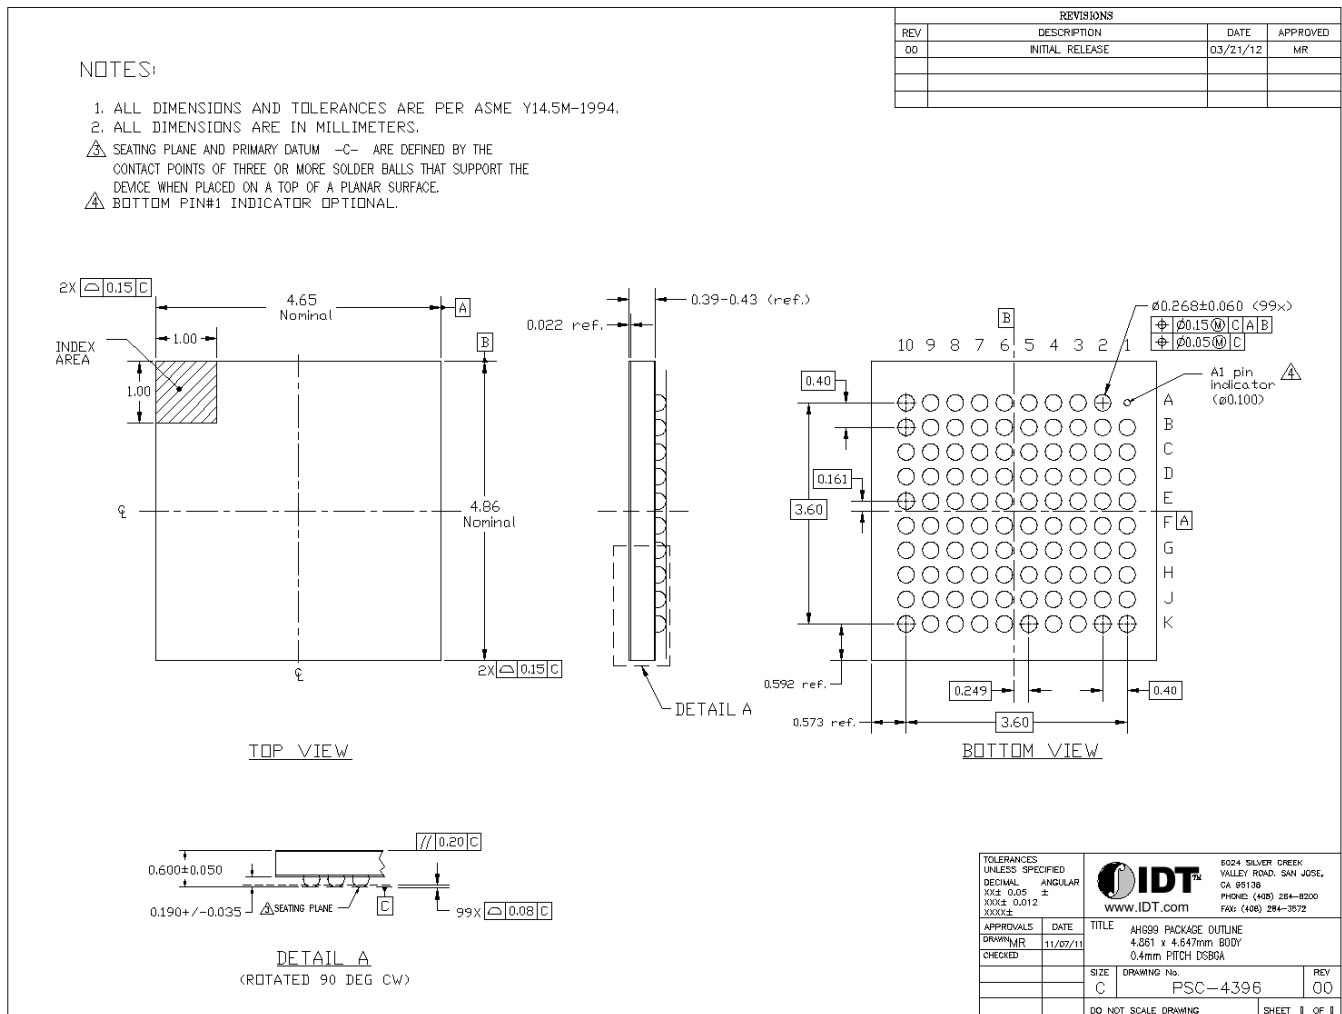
Package Outline Drawing (AHG99 WLCSP-99 4.86x4.65x1mm 99-Balls)
